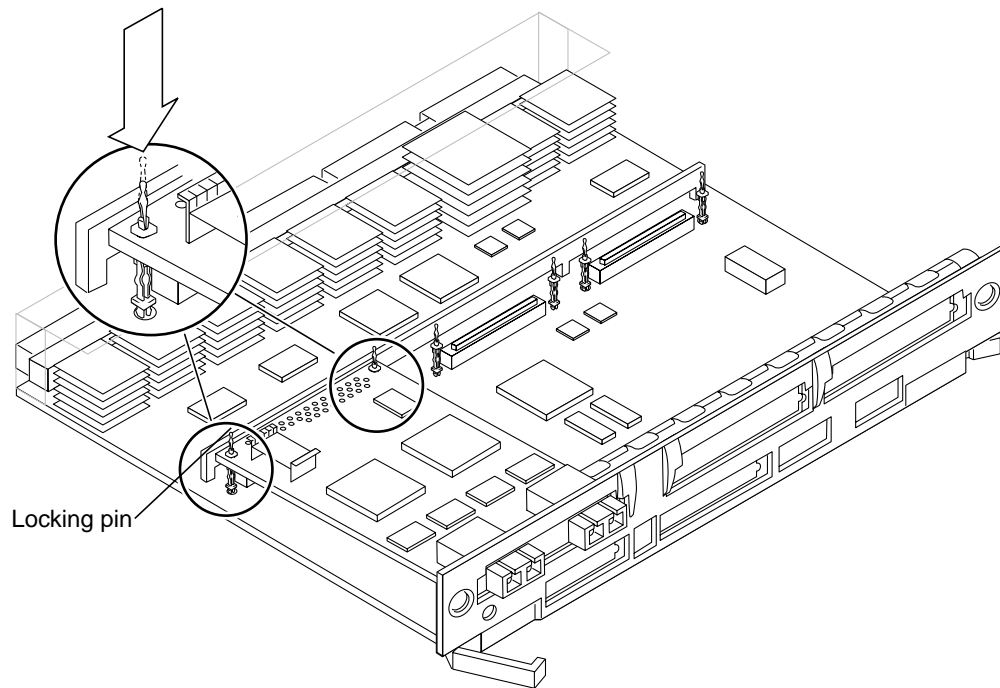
Securing the Adapter With the I/O Board Locking Pins
